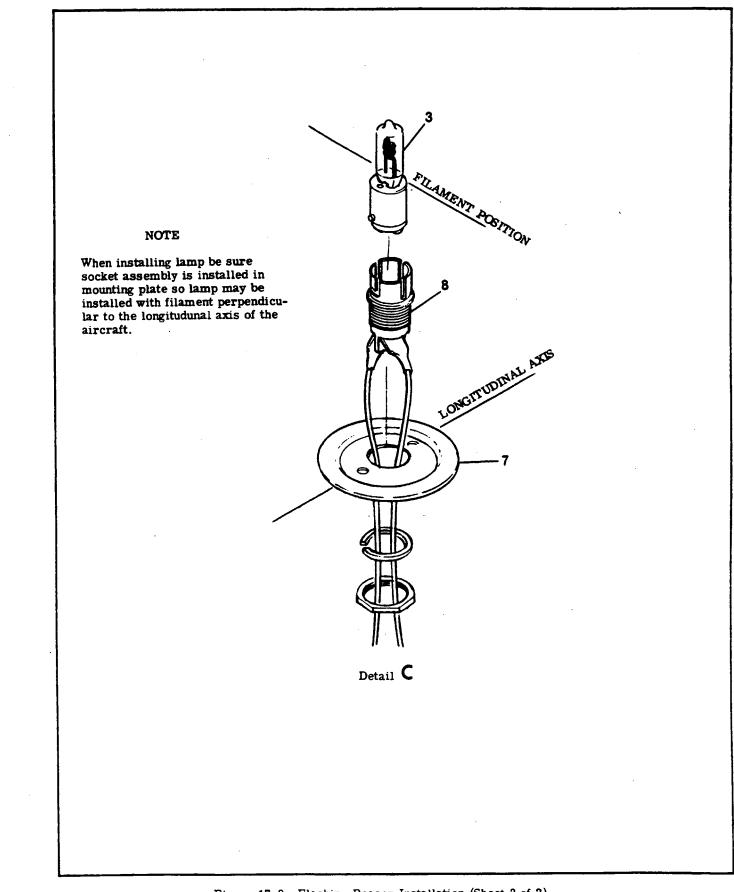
Flashing Beacon Installation (Sheet 2 of 2)
